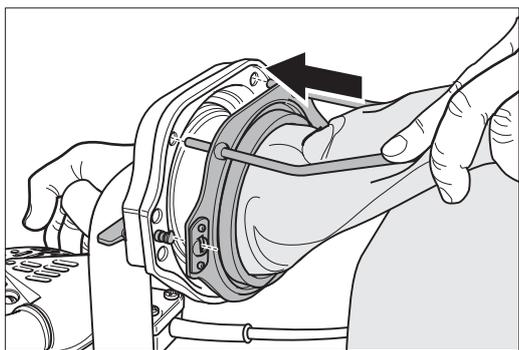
Push the dust bag over the locating flange and fix with the two metal studs.
